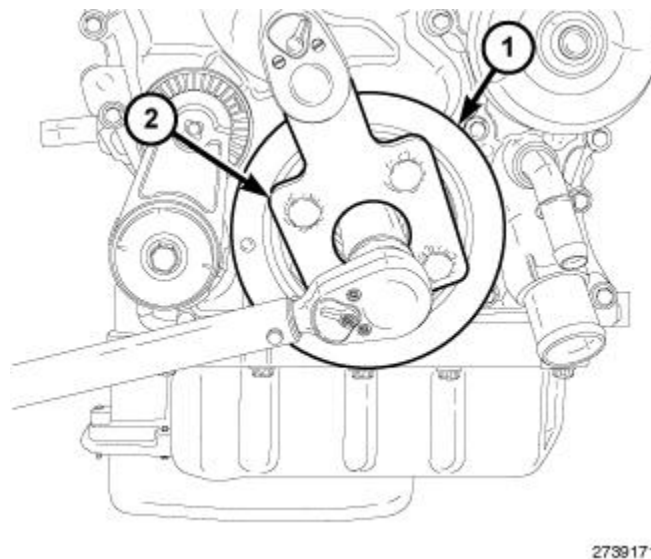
Crankshaft Vibration Damper & Vibration Damper Holder
